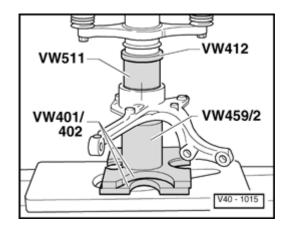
Wheel bearing, pressing into wheel bearing housing
